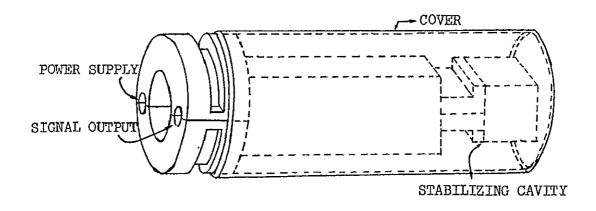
Sketch of Assembled Packaging (alternative [B])
